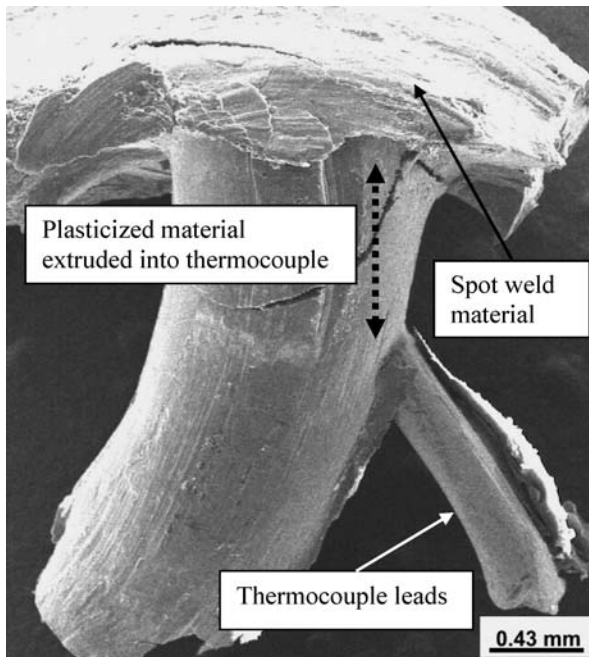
Spot weld material and thermocouple tip removed from tool after temperature measurement.
